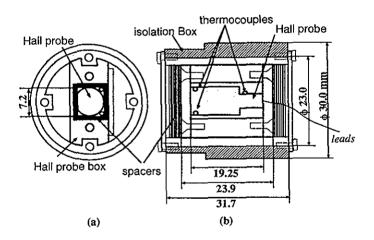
(a) Cross section of the Hall-probe housing: The Hall probe was fixed tightly and adjusted with some 0.1 mm-thick spacers both vertically and horizontally. Each thermocouple was insulated from the Hall probe with a Mylar sheet. (b) Top view of Hall probe housing: Hall-probe box position along the central axis of the isolation box was adjusted with spacers with an accuracy of 0.1 mm. Plastic screws were used.
